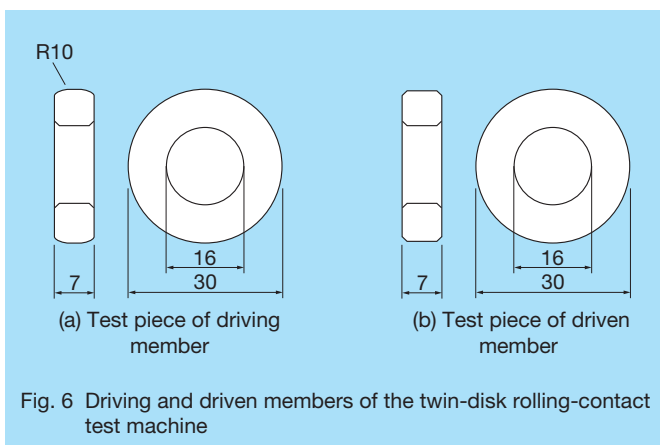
Driving and driven members of the twin-disk rolling-contact test machine
